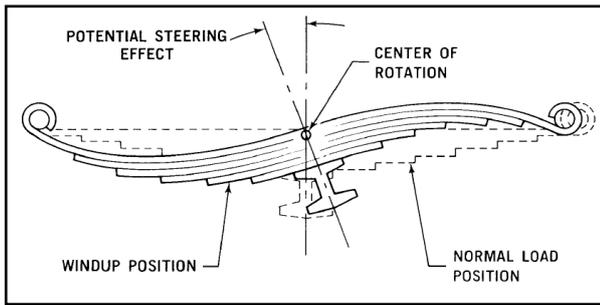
Spring wind up - Brake Steer Phenomena [2]
